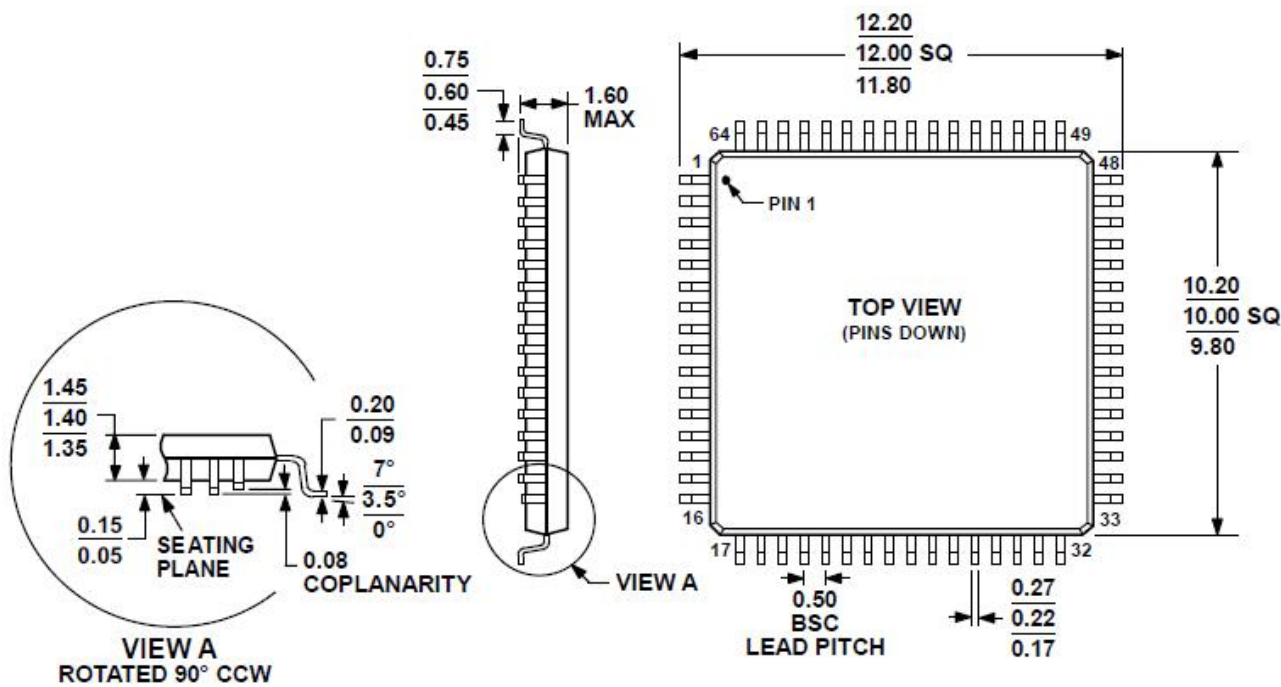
Lead Low Profile Quad Flat Package [LQFP]
